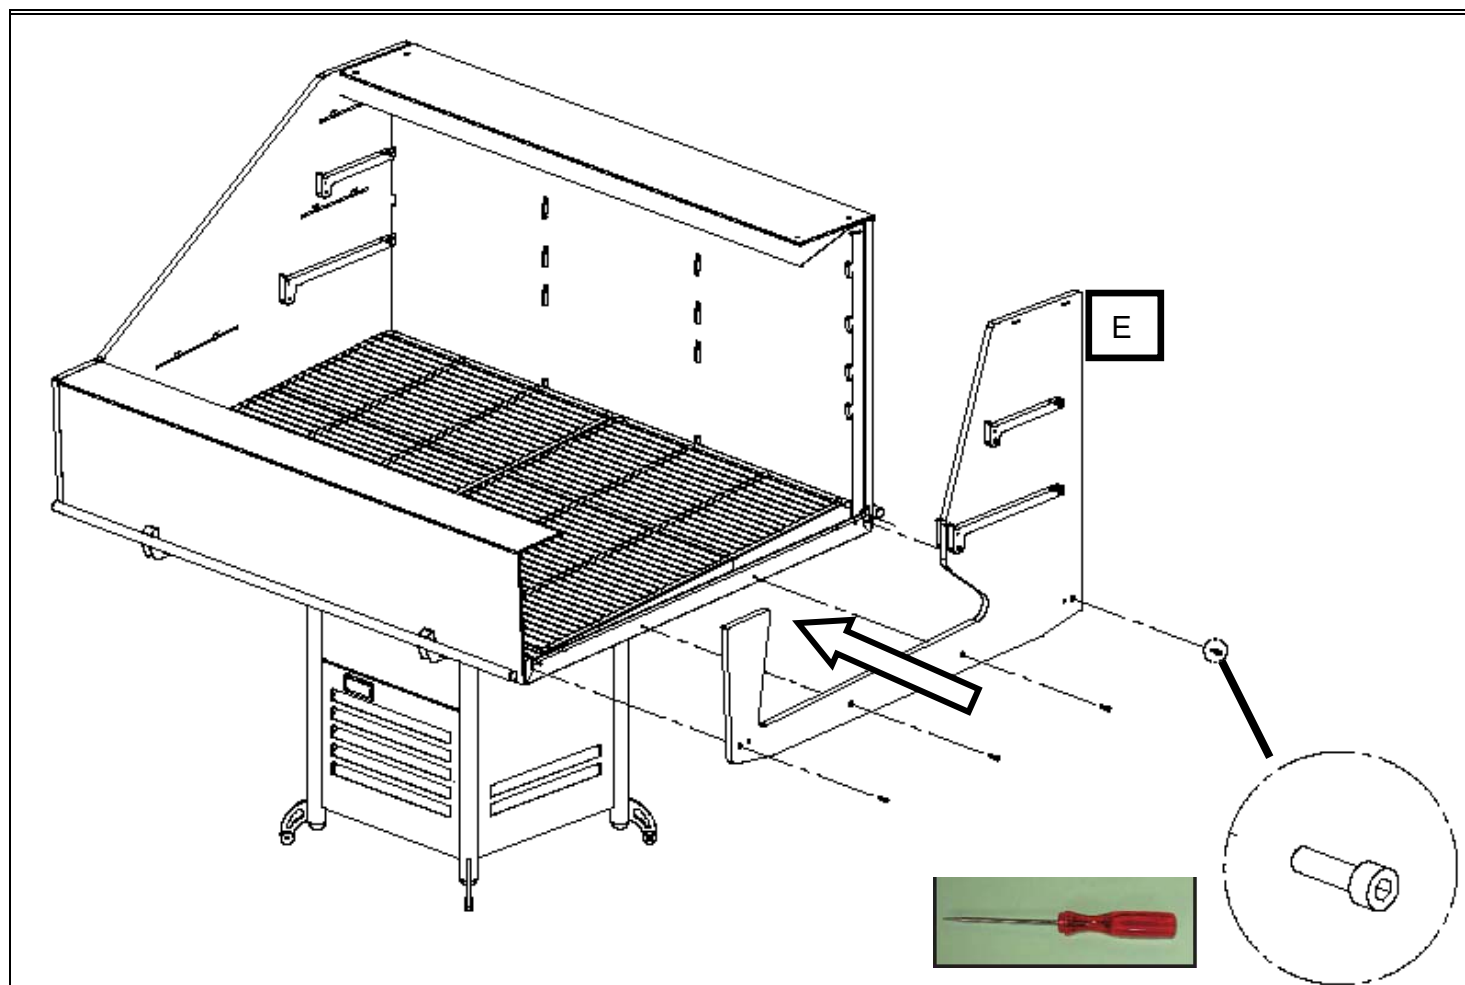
fit the multiplexing side panel, fasten using the same screws that were previously removed.
